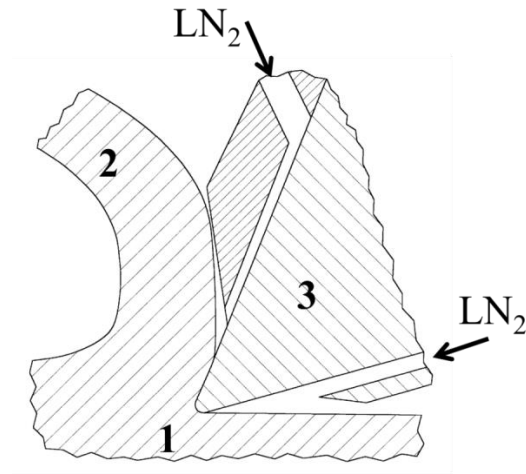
Cryogenic cooling device for turning operations with integrated chip breaker designed and patented by Hong (1999). 1- workpiece, 2- chip, 3- cutting tool.
